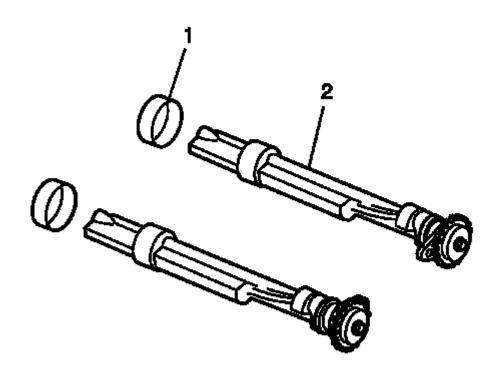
Balance Shafts Courtesy of GENERAL MOTORS COMPANY
